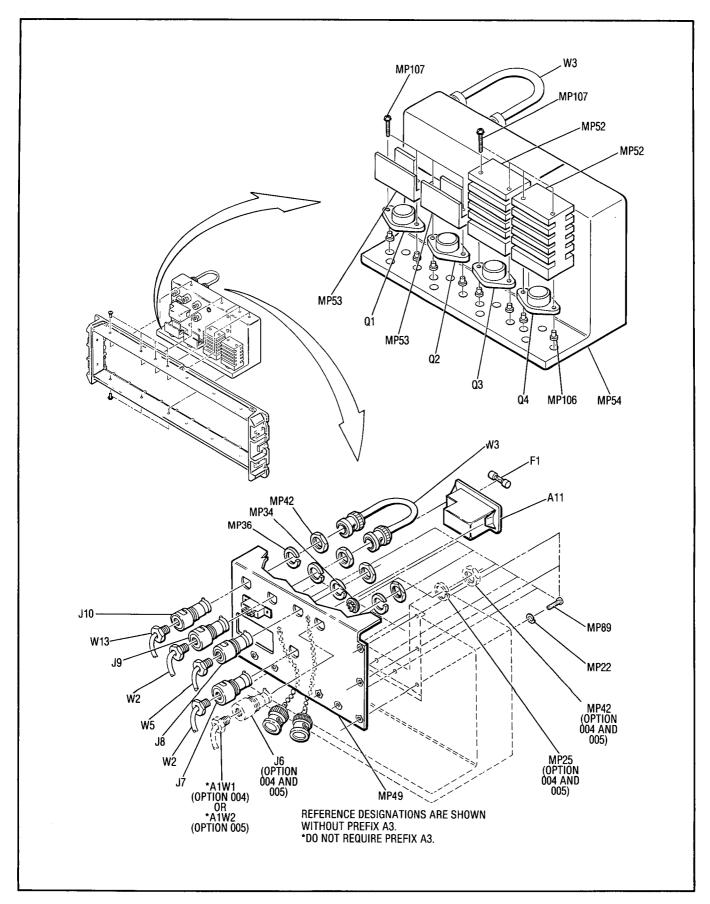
A3 Power Supply and Rear Panel Parts Identification
